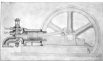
A large industrial machine, possibly a pump or motor, with a large flywheel on the right side.
